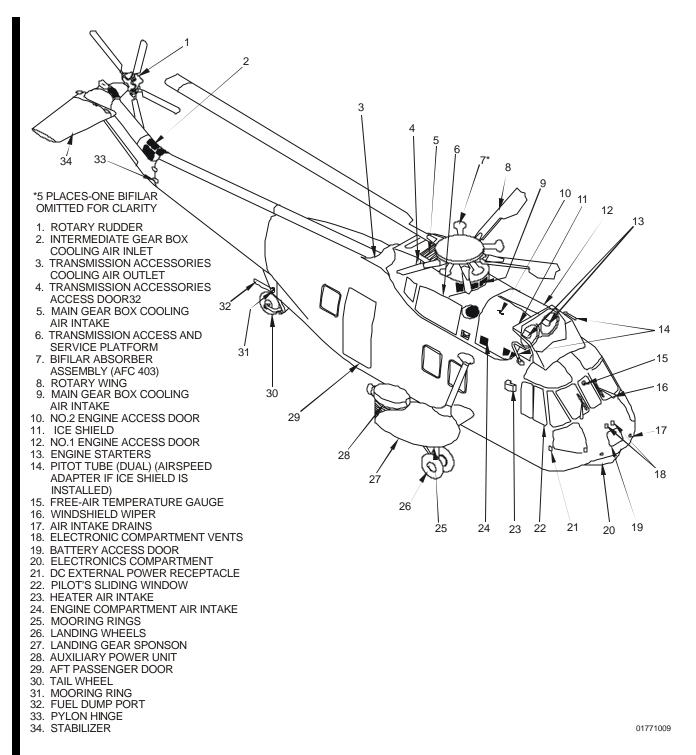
(ET) General Arrangement 3/4 Exterior
